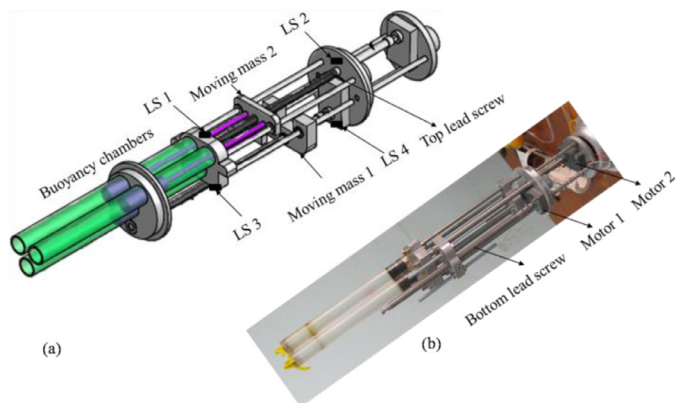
(a) CAD model of VB engine (b) fabricated model of VB engine.
